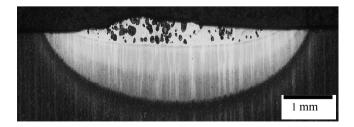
View of the X40CrMoV5-1 hot-work alloy tool steel after alloying with the WC tungsten carbide, laser power of 1.2-2.3 kW
